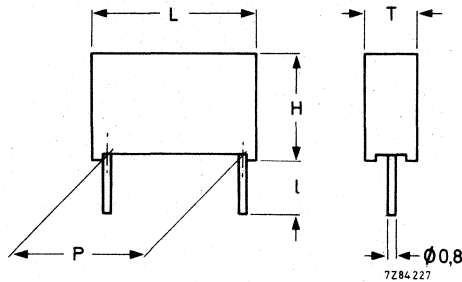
For dimensions T, L, H, P and I, see Table 2.
